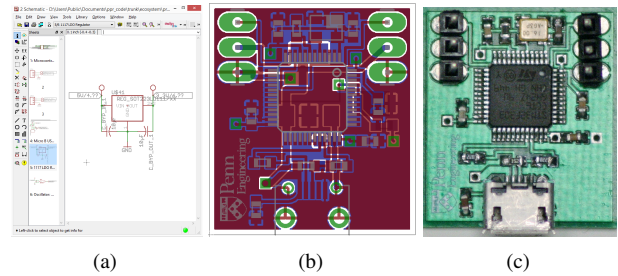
The generated EMLab schematic in EAGLE (a), placed and routed board in EAGLE (b) and final fabricated PCB (c).
